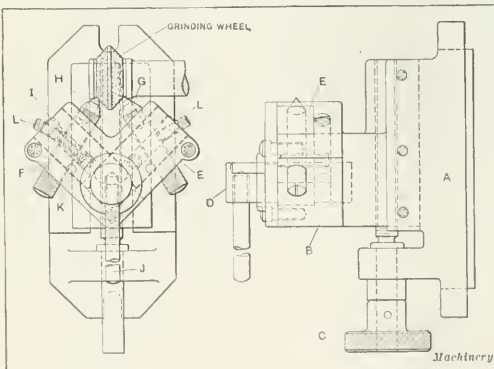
Detail of Double Angle Wheel Truing Device shown in Fig. 16
